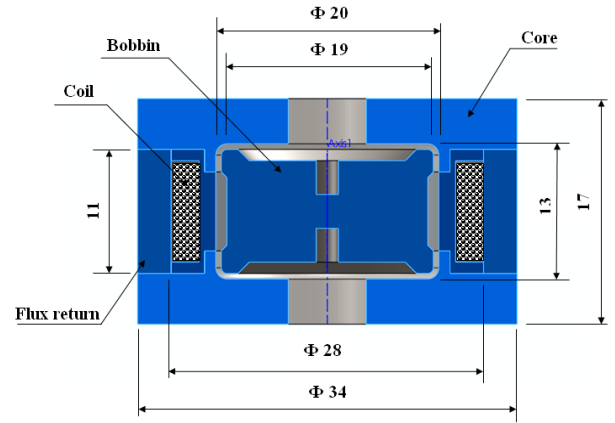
Schematic showing the Design and Dimensions of new MR valve
